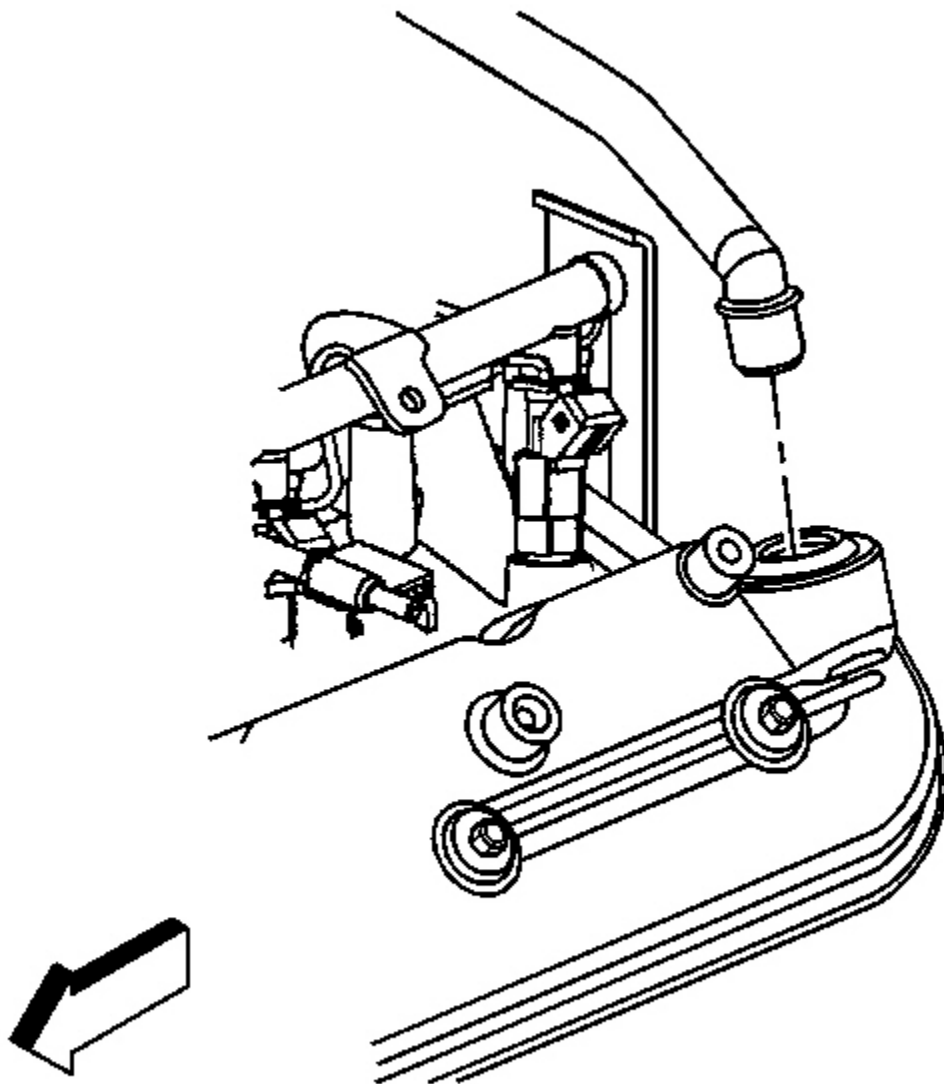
Left Rocker Arm Cover & PCV Valve Pipe
